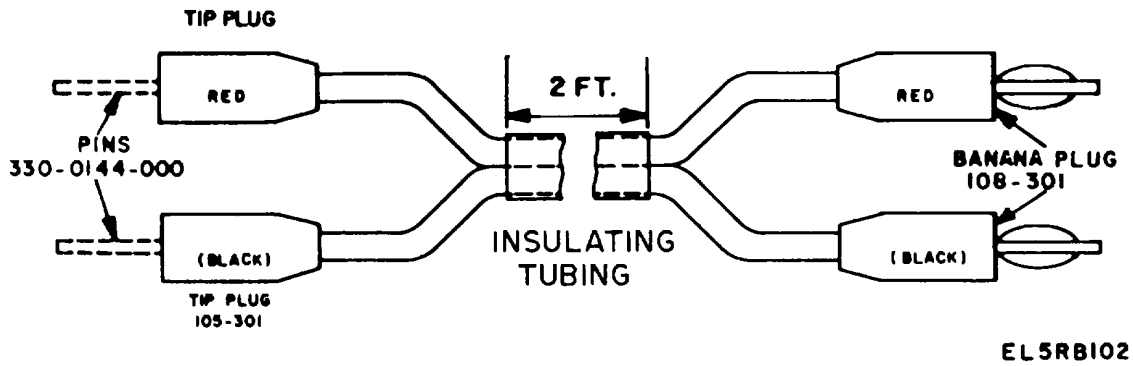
Test Lead PEN-SK-005, Assembly Drawing
